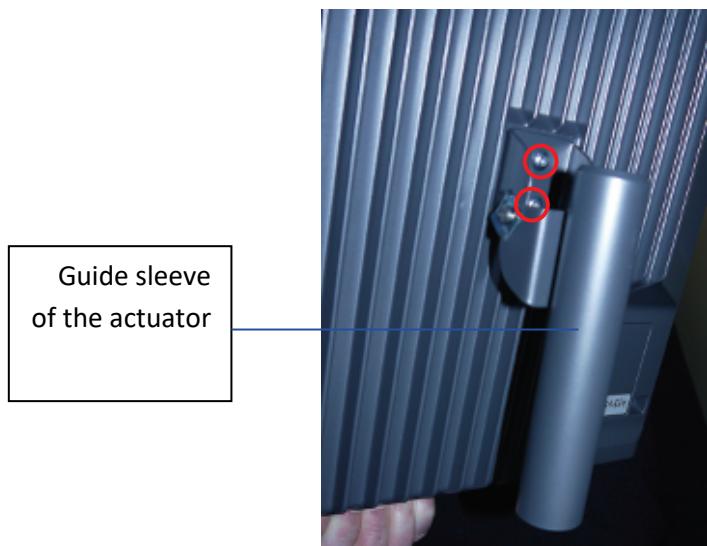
Mounting the guide sleeve of the actuator to the CC300
